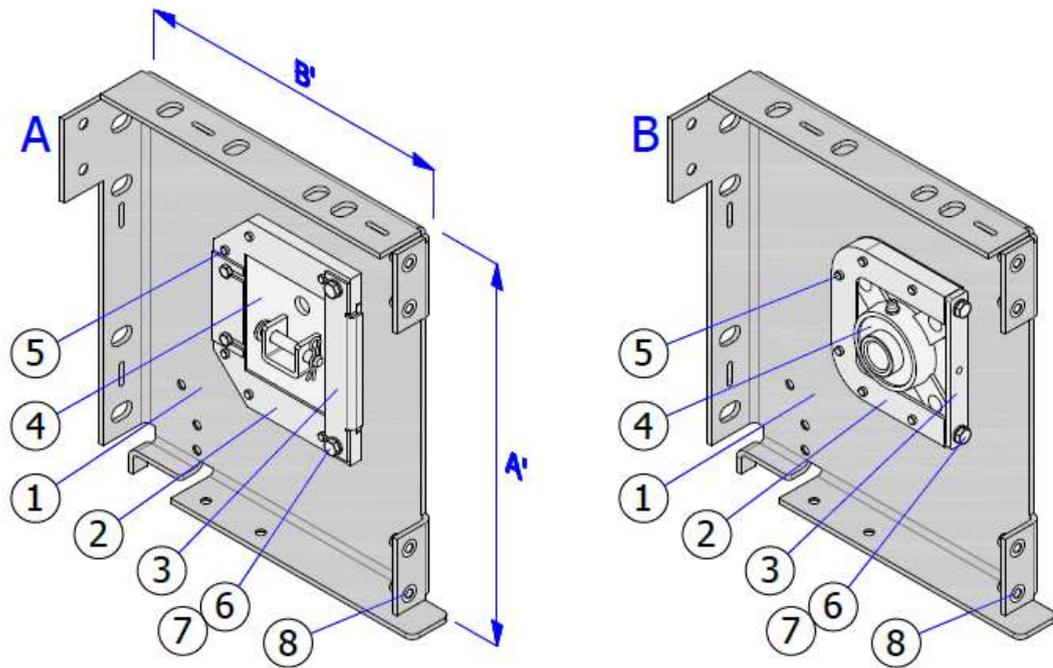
ISOiK-Ok60-01.08 [Shaft bracket, A – drive side, B – passive side]
